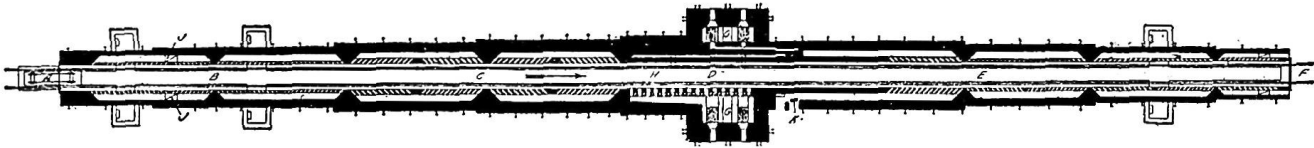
Diagrammatic plan of Didier-March tunnel kiln.
